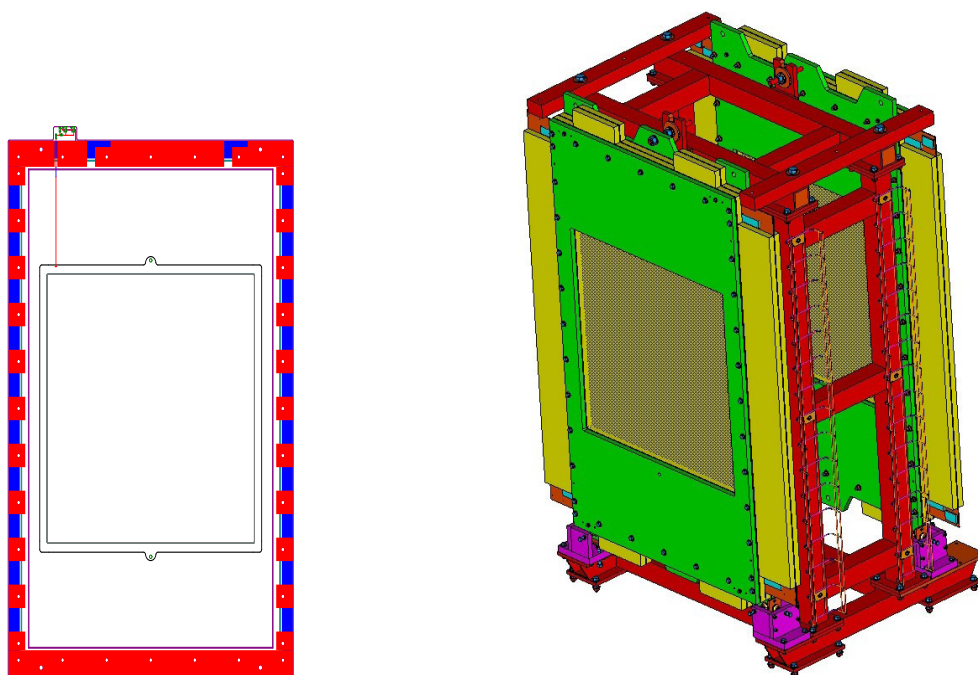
(Left) Technical drawing of cathode (k-plane) PCB. (Right) Technical drawing of the two drift chambers mounted in the Aluminum frame such that the scattered particles would enter the chamber from the left. The chambers are fixed to the frame by a bolt through the top tab on the chamber plate which allows for fine adjustments to the pitch. The downstream chamber (DC2) is mounted in the reverse orientation from the upstream chamber (DC1).
